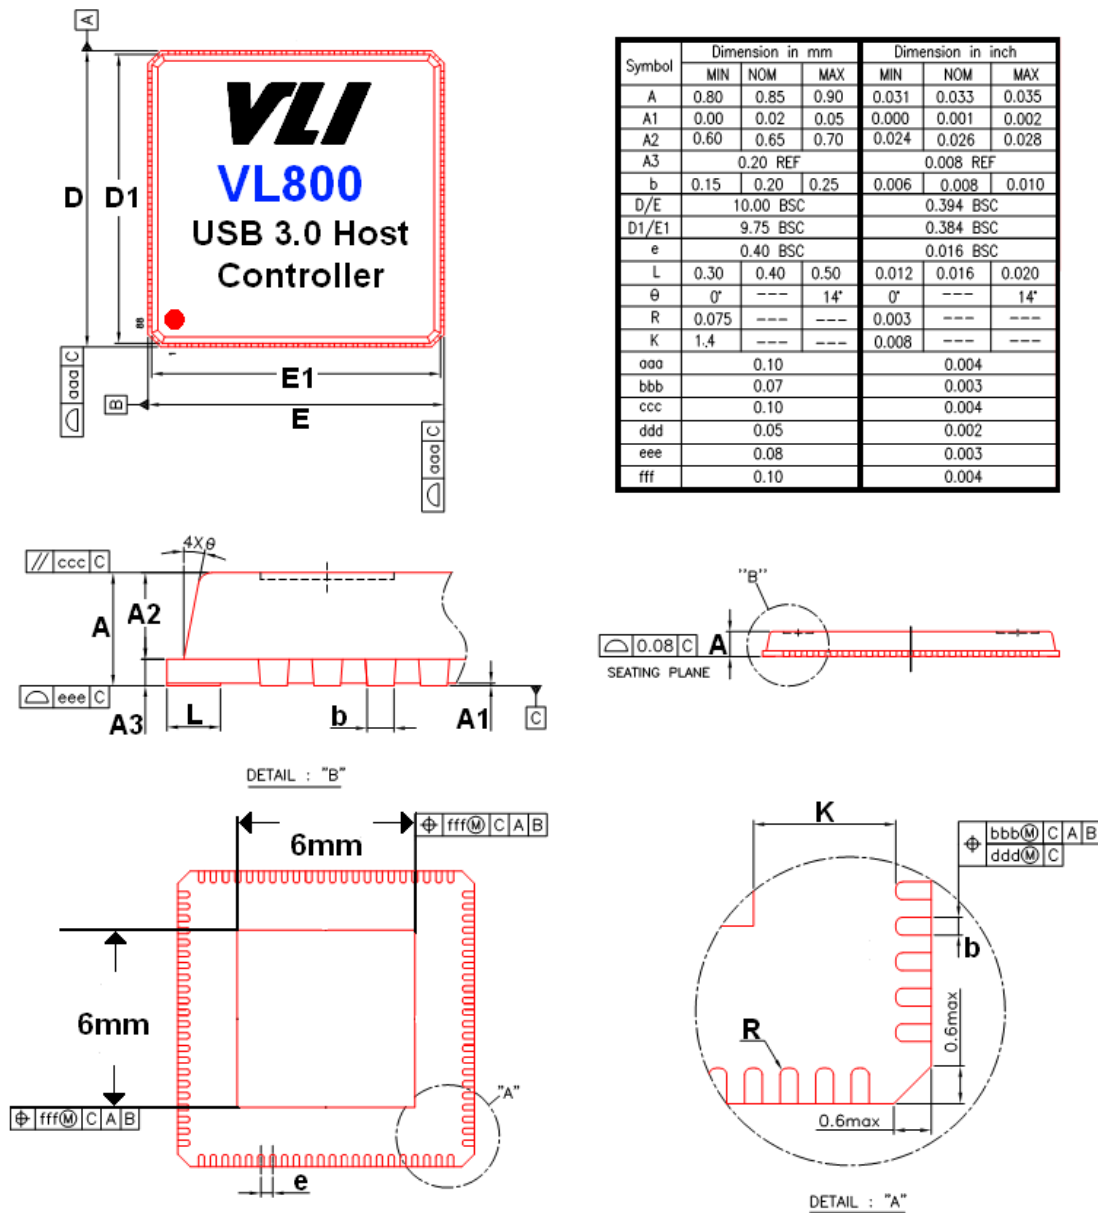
Mechanical Specification – QFN 88L 10x10x0.85 mm Package
